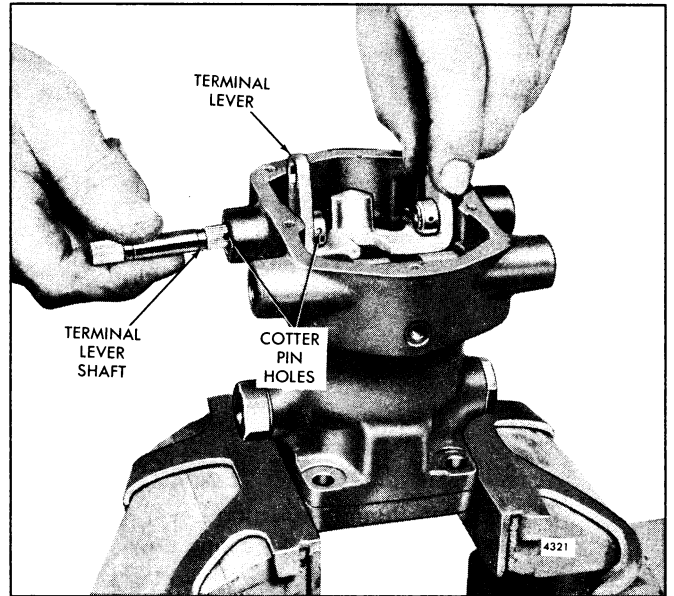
Installing Terminal Lever Shaft in Governor Housing and Terminal Lever
